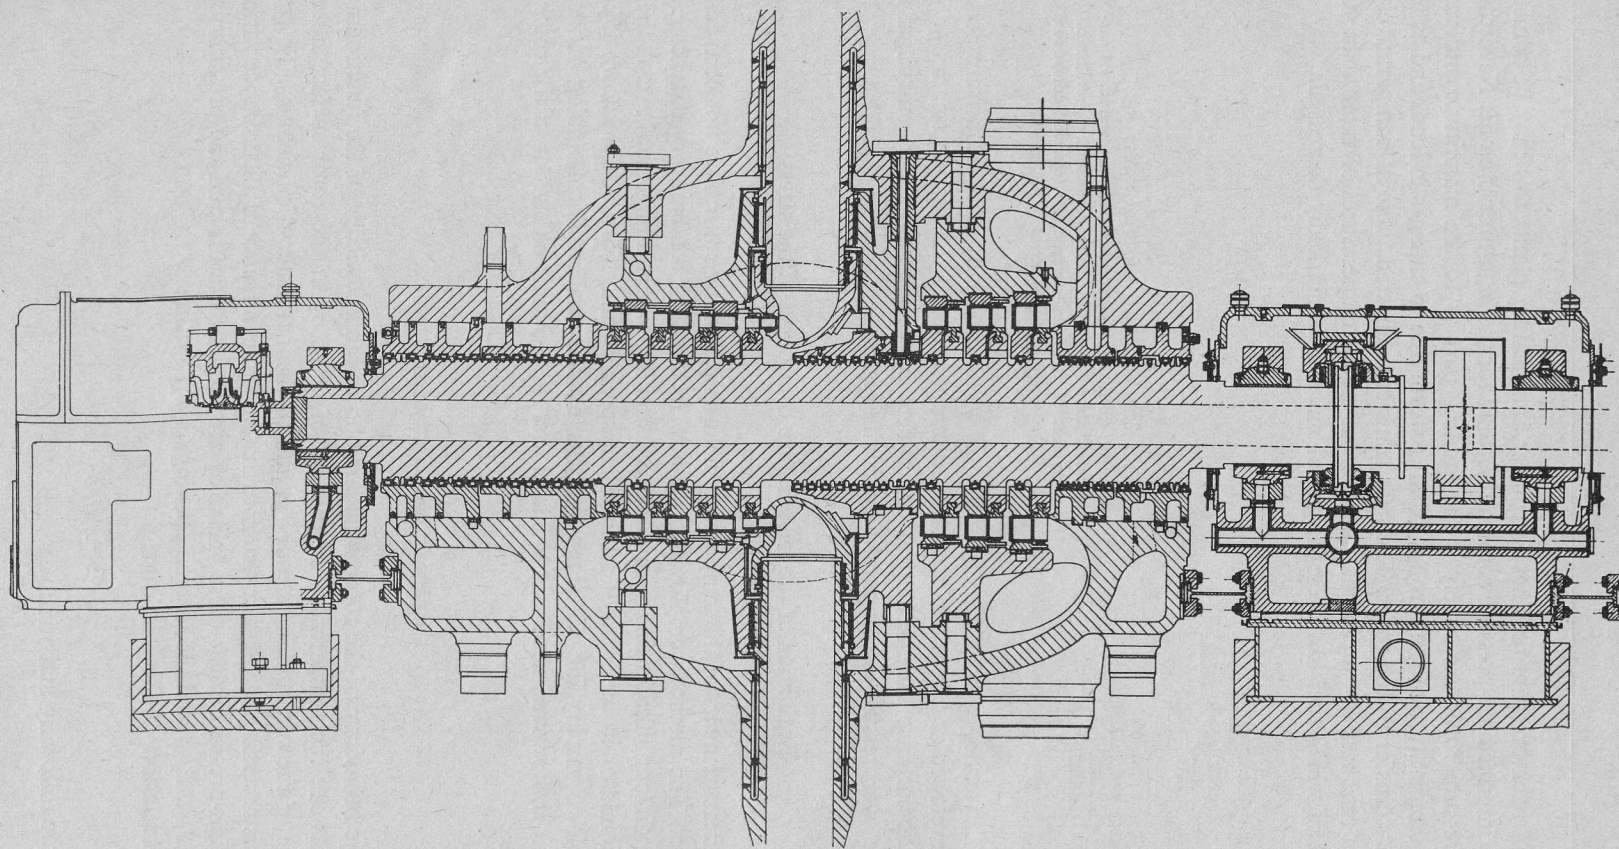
Sectional view of the high-pressure section of the 500 MW turbine. The probe in the inner gland body
